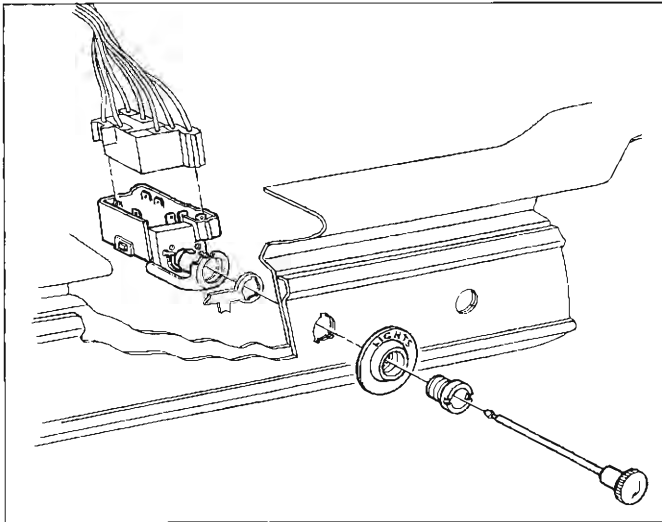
Lighting Switch Assembly (Chevrolet Shown)
